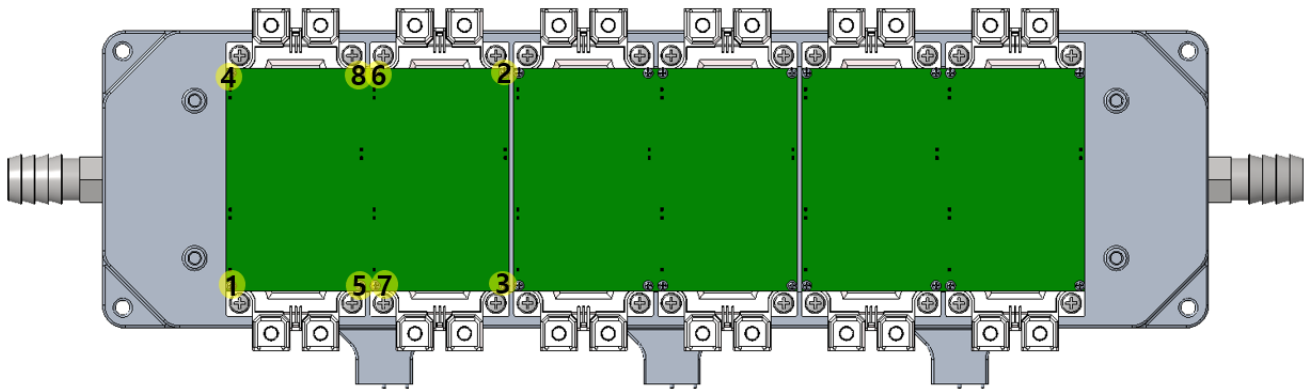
Sequence of M2.5 Screw Fixing_PCB
